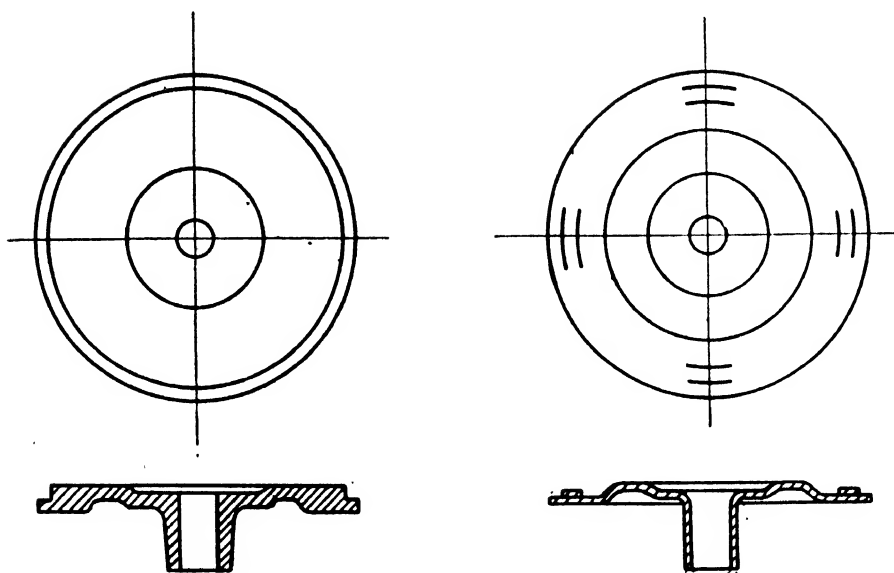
Replacement of cast iron housing (*left*) by pressed and drawn sheet steel product (*right*), reducing both weight and machining time. Observe sheared and raised locating spigots near rim, and thick wall to sides of thimble produced by special drawing procedure.
